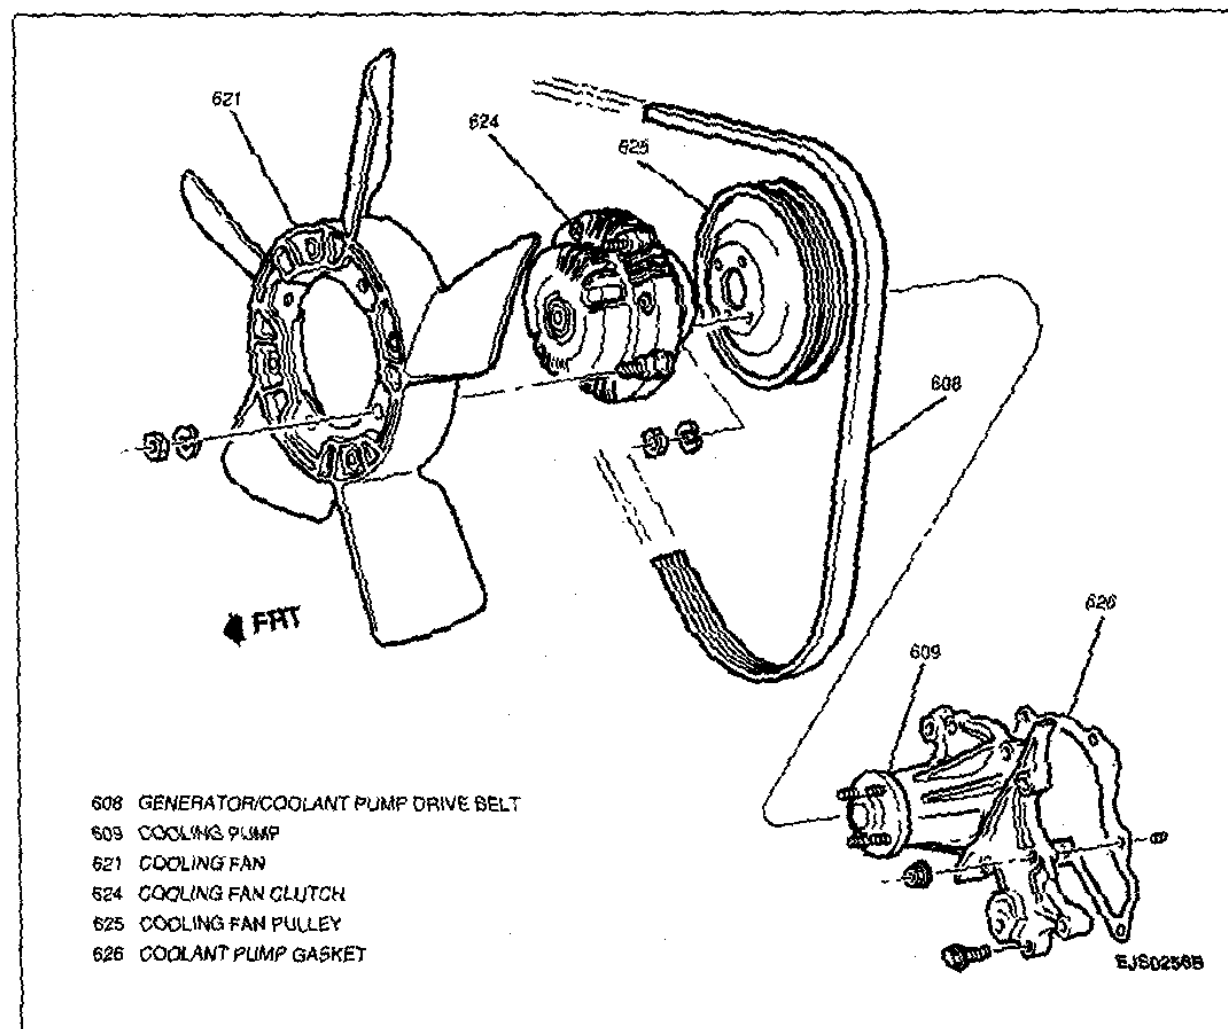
Cooling Fan, Fan Clutch, Coolant Pump and Pulley
